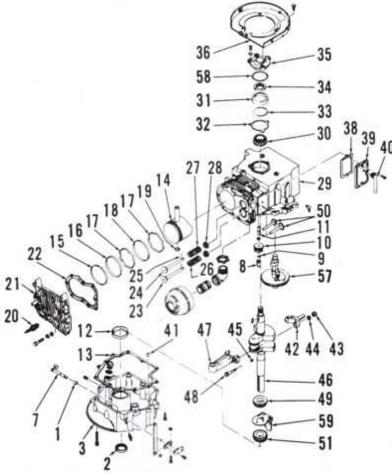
Exploded view of Model VH80 or VH100 vertical crankshaft engine.
